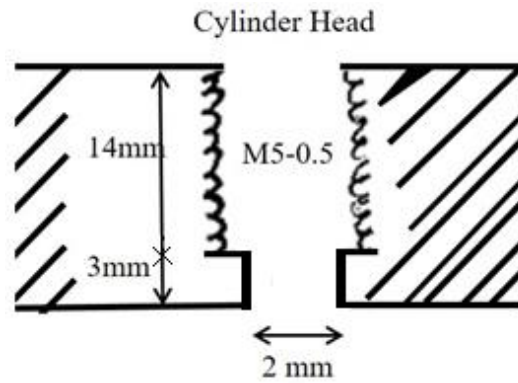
Mechanical drawing of the hole with thread for placing the pressure sensor
